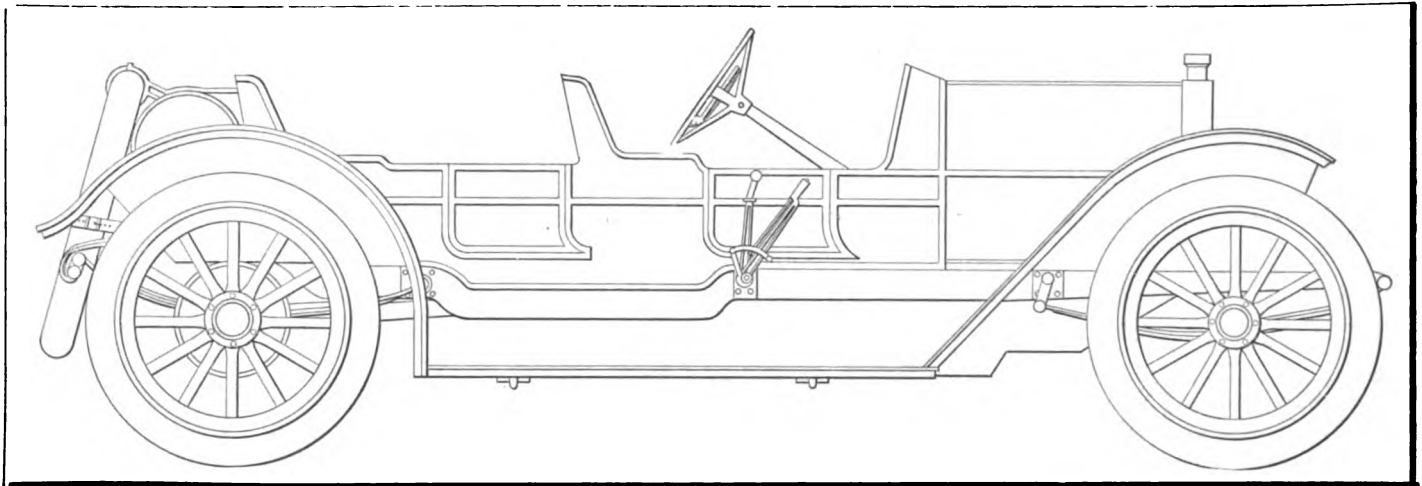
Type of body suggested by a reader of "The Automobile" in describing his ideal 1912 car
